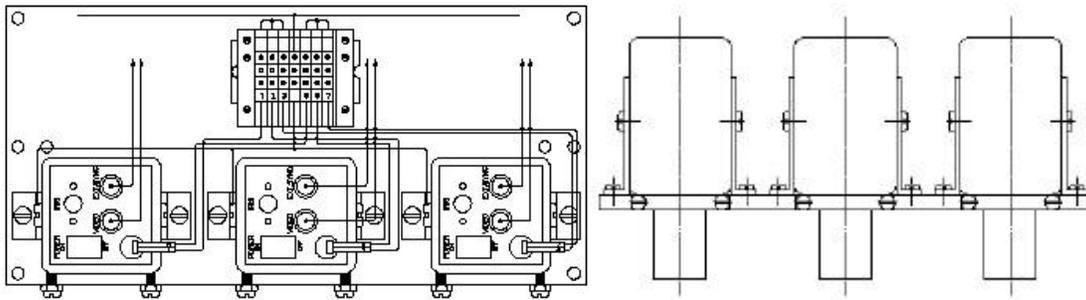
Camera Mounting Plate Assembly 4 inch (10.16 centimeters) field of view system setup
